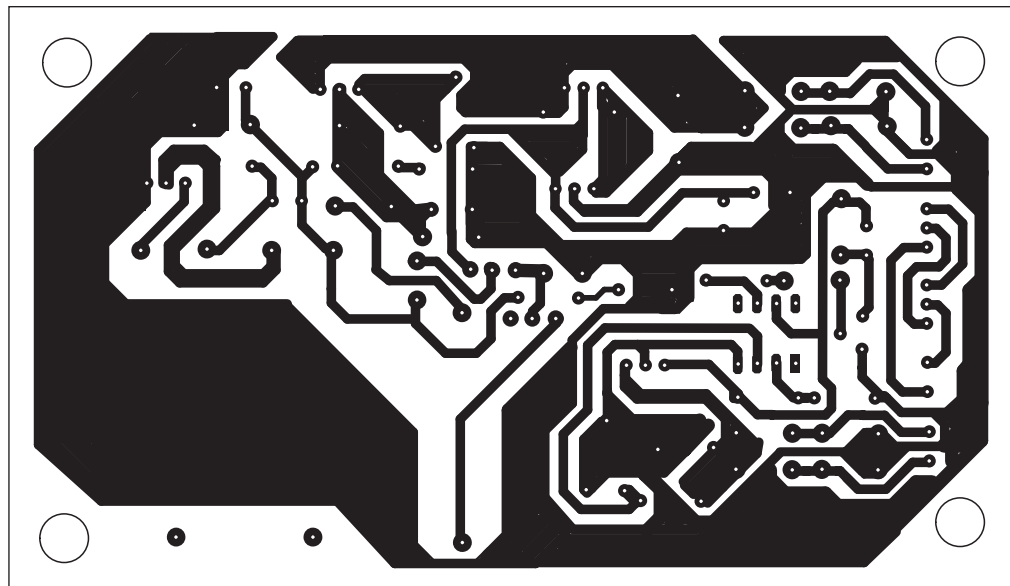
Actual-size, single-side PCB layout of multi-feature choke for fluorescent tube
